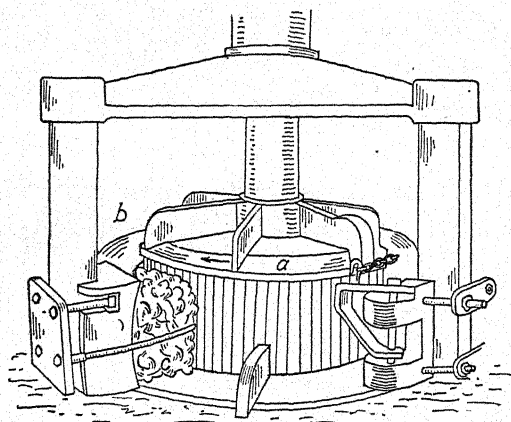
Mechanical squeezer. *a.* Toothed cylinder. *b.* Housing. *c.* Wrought-iron ball. (Courtesy of Reading Iron Company.)
